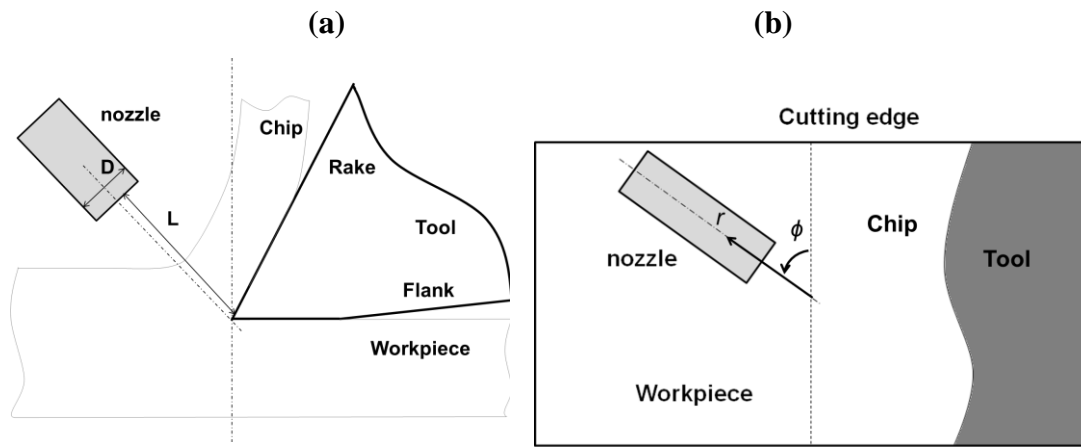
Illustration of coolant applied by jet nozzle (a) nozzle position (b) the view perpendicular to coolant axis (Li, 1996)
